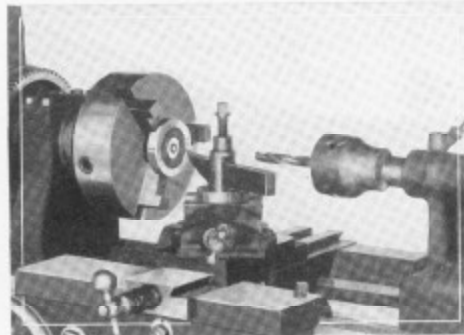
Drilling and Facing a Gear Blank Held in a Three Jaw Chuck
